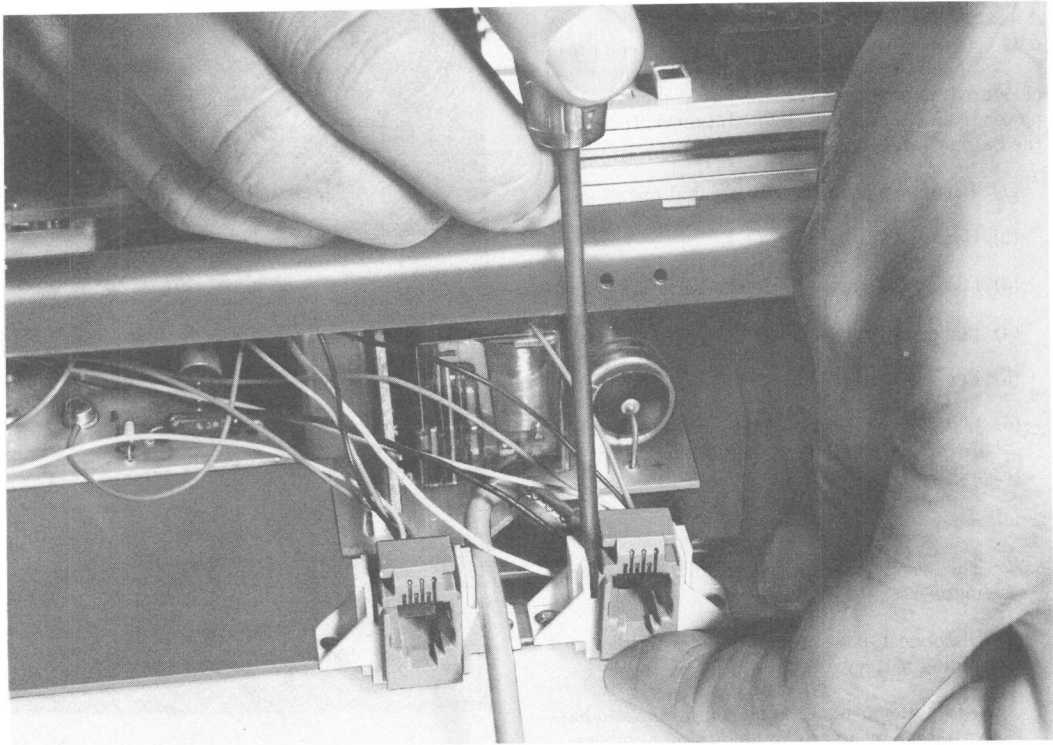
Removing Mounting Cord Jack or Interface Cord Jack From Dial Base
